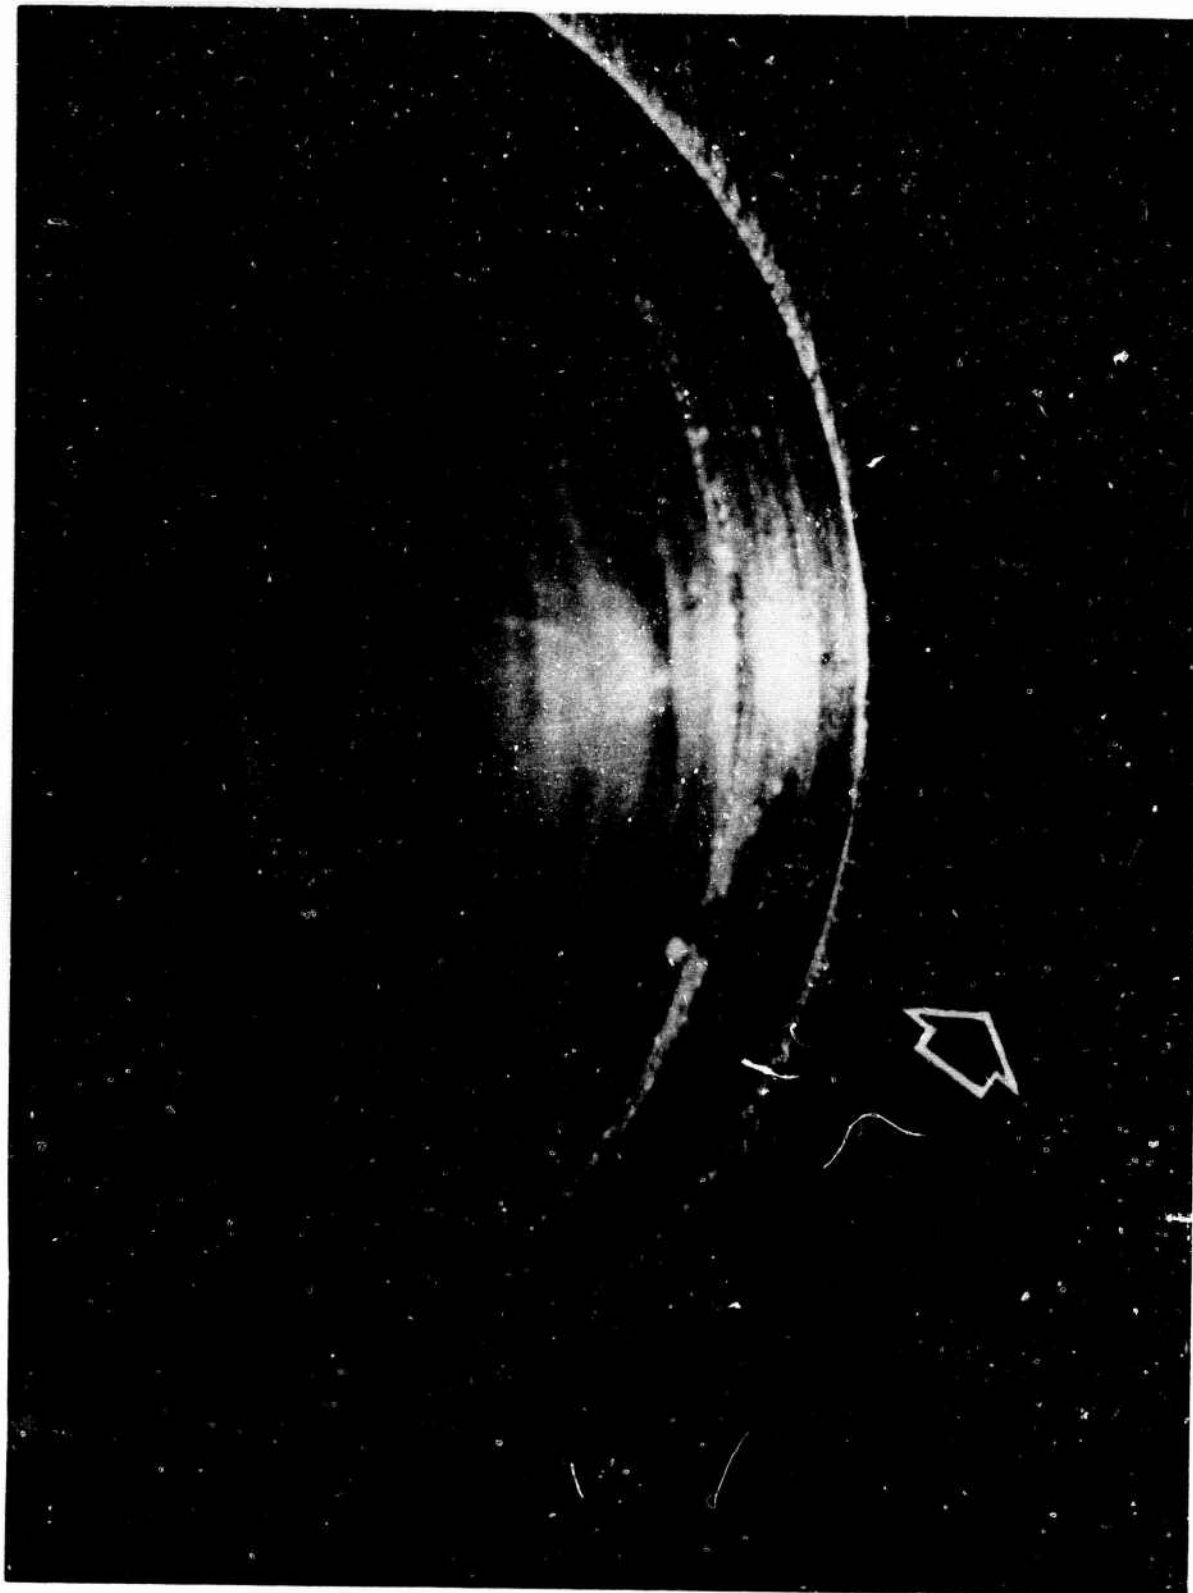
View of Rear Spar Fatigue Crack and Inside Bolt Hole.
